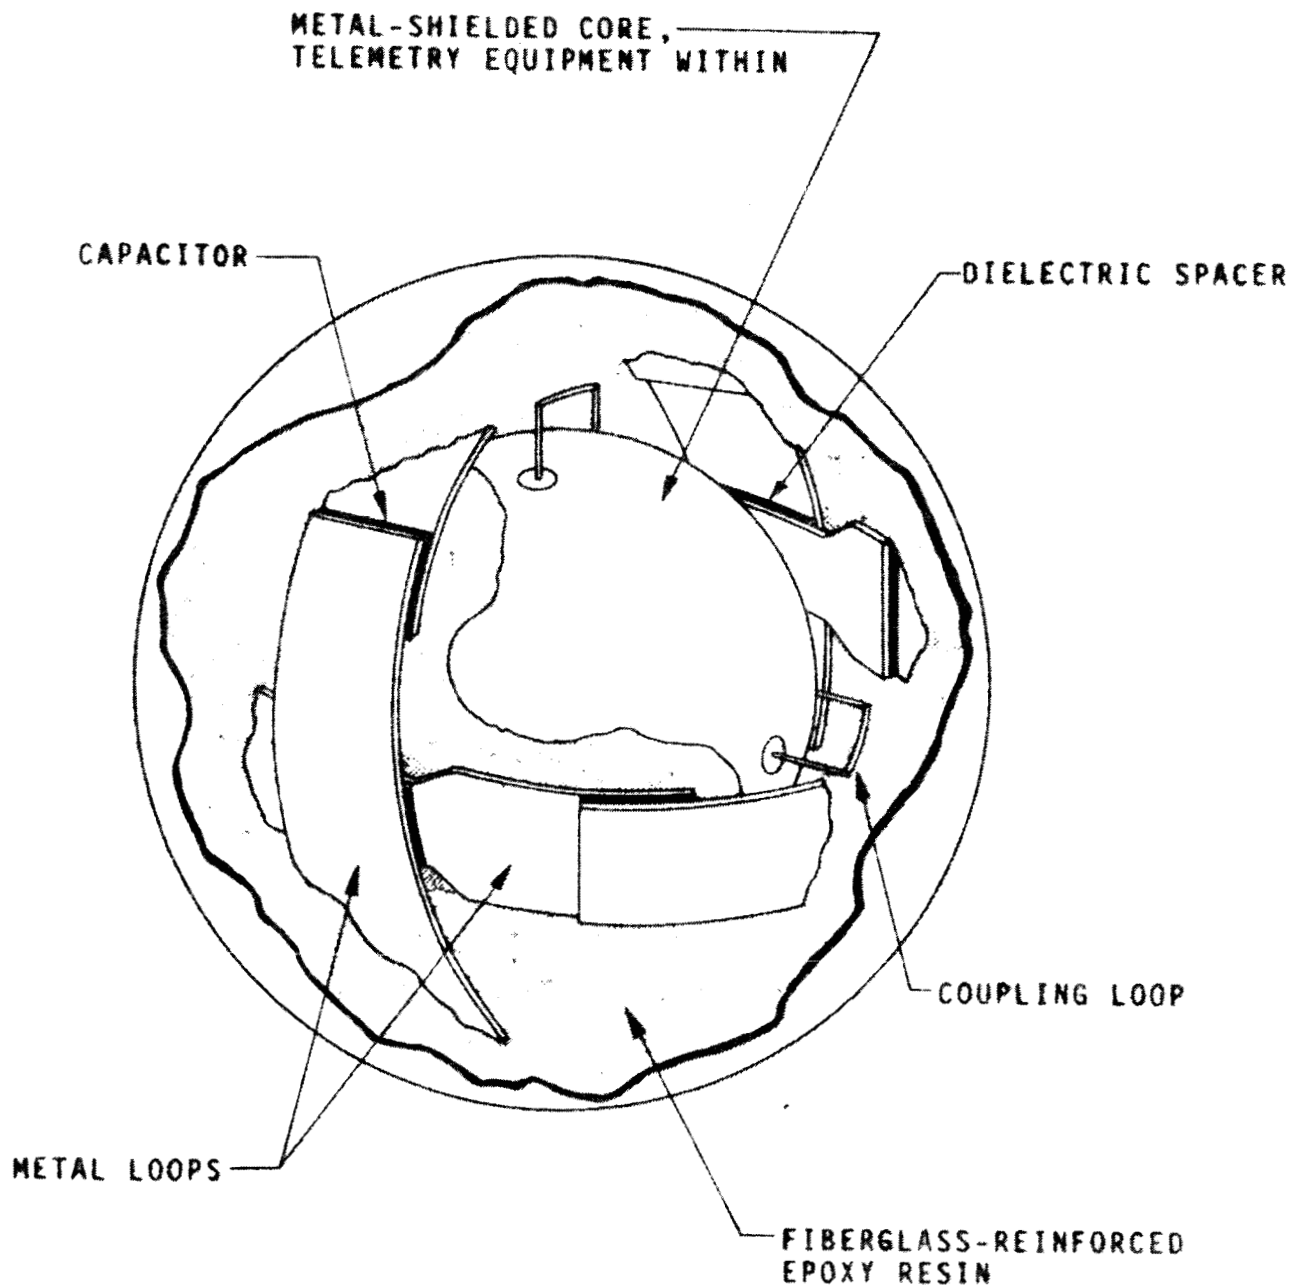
Cutaway view of crossed-loop antenna assembly.
